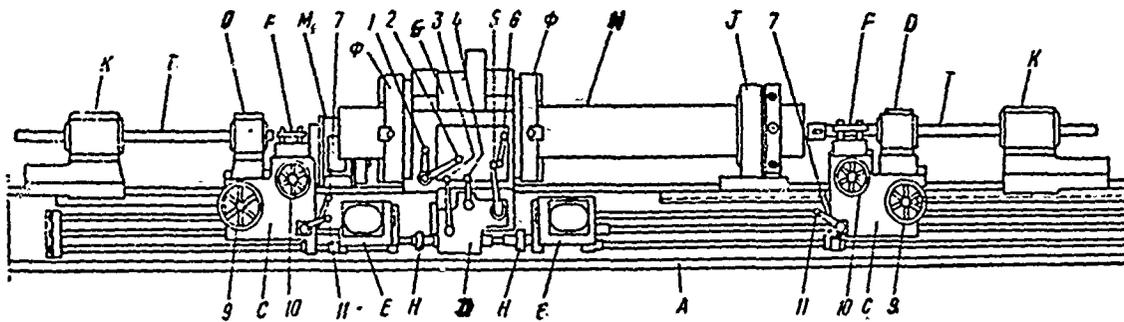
Horizontal two-sided drilling and boring machine -- 3
